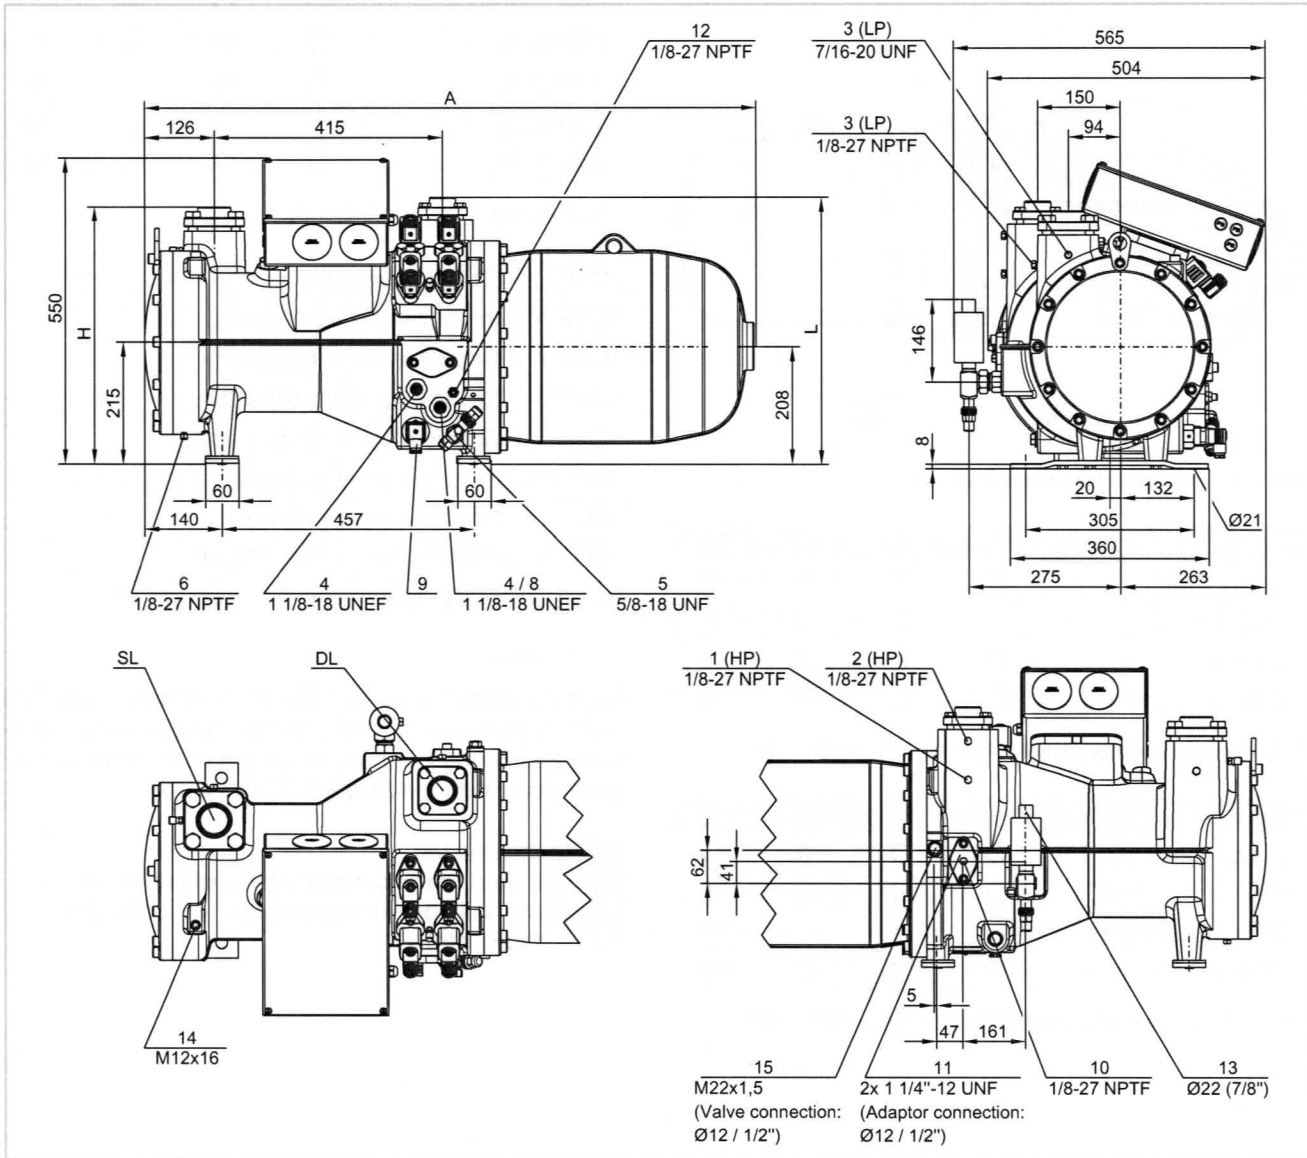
Dimensional drawing CSH6553-35Y .. CSH6593-60Y, CSK6151 .. CSK6161
